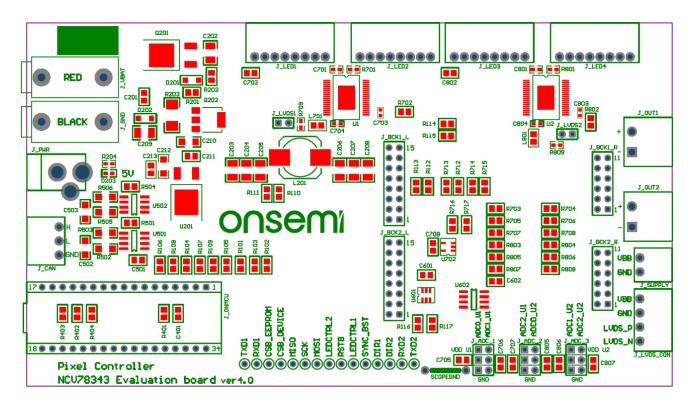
NCV78343R1GEVB Evaluation Board Assembly Drawing
